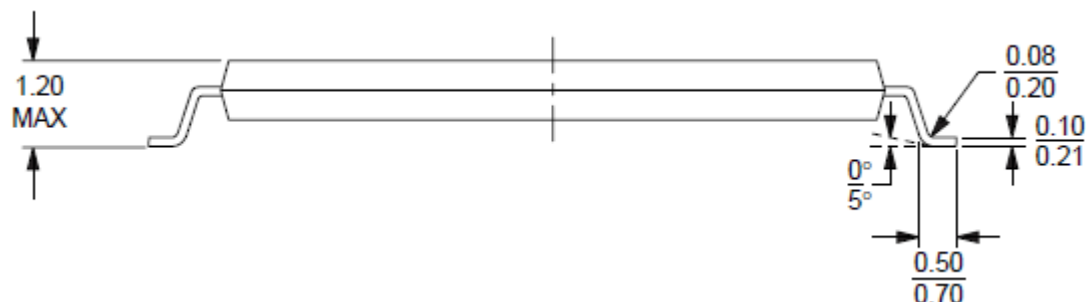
Typical Dimensional Drawing (AM28F020-120PI example)
